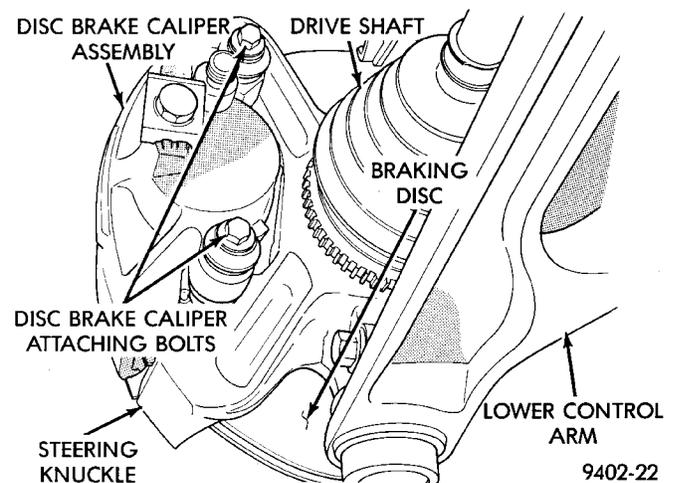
Front Disc Brake Caliper Assembly Bolts
